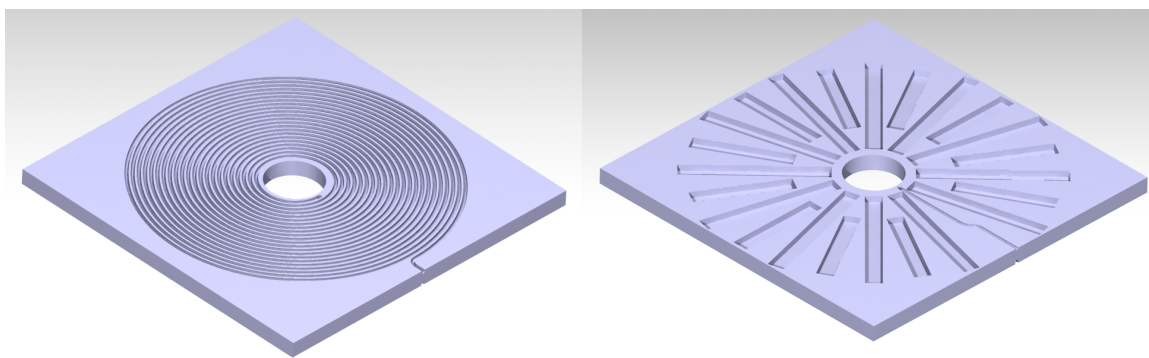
Catia V5 Mechanical Drawing of Magnetic Pads
